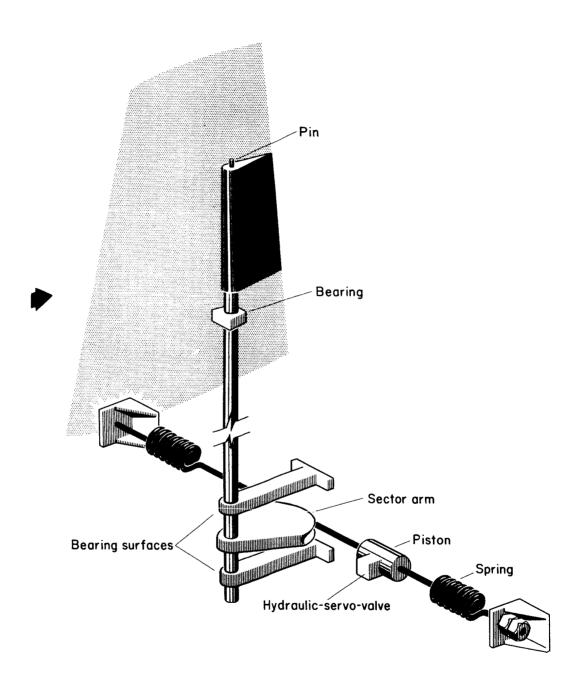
Schematic drawing of the mechanical details of the controlsurface drive system.
